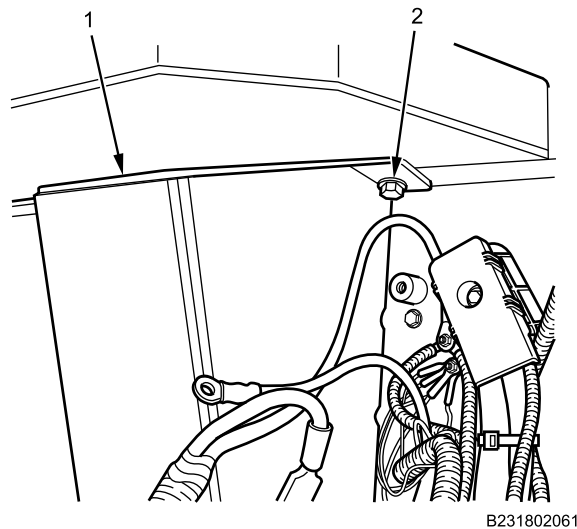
DCM Left Side Exterior Armor Upper Outboard Bolt.
